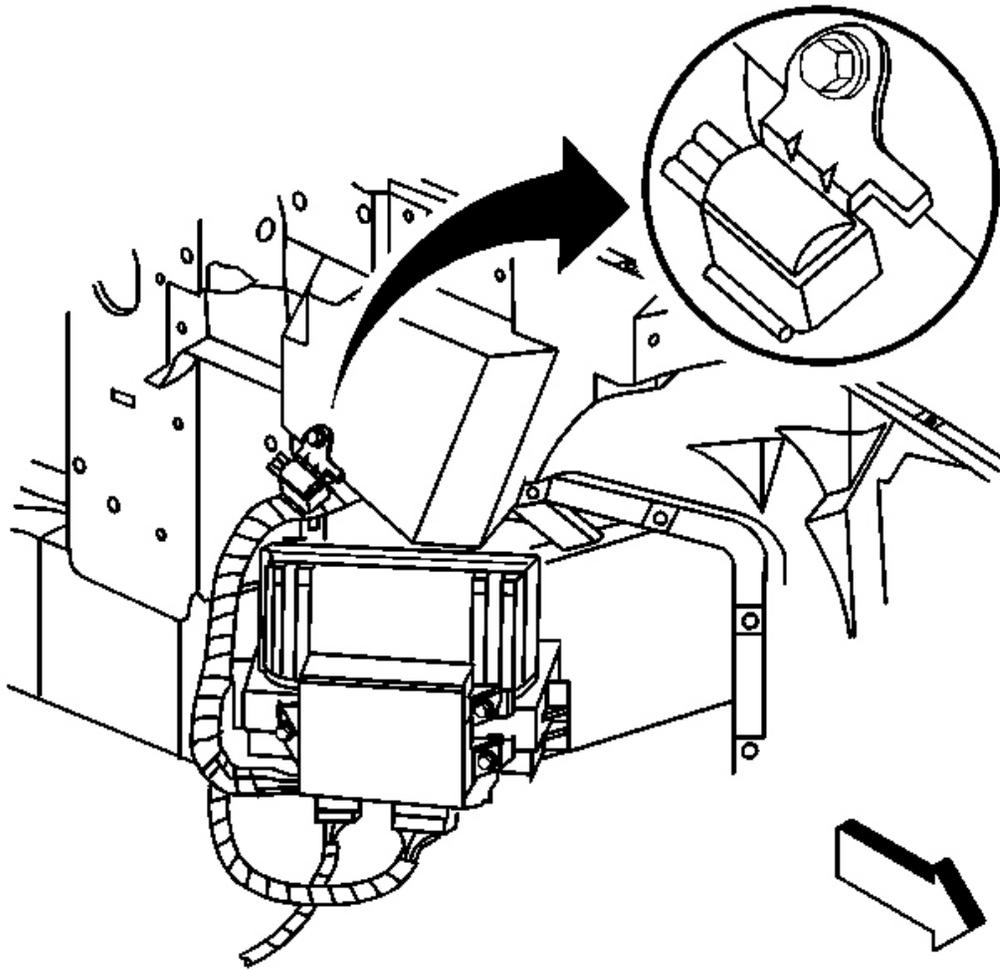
Air Shut Off Valve Vacuum Hose
